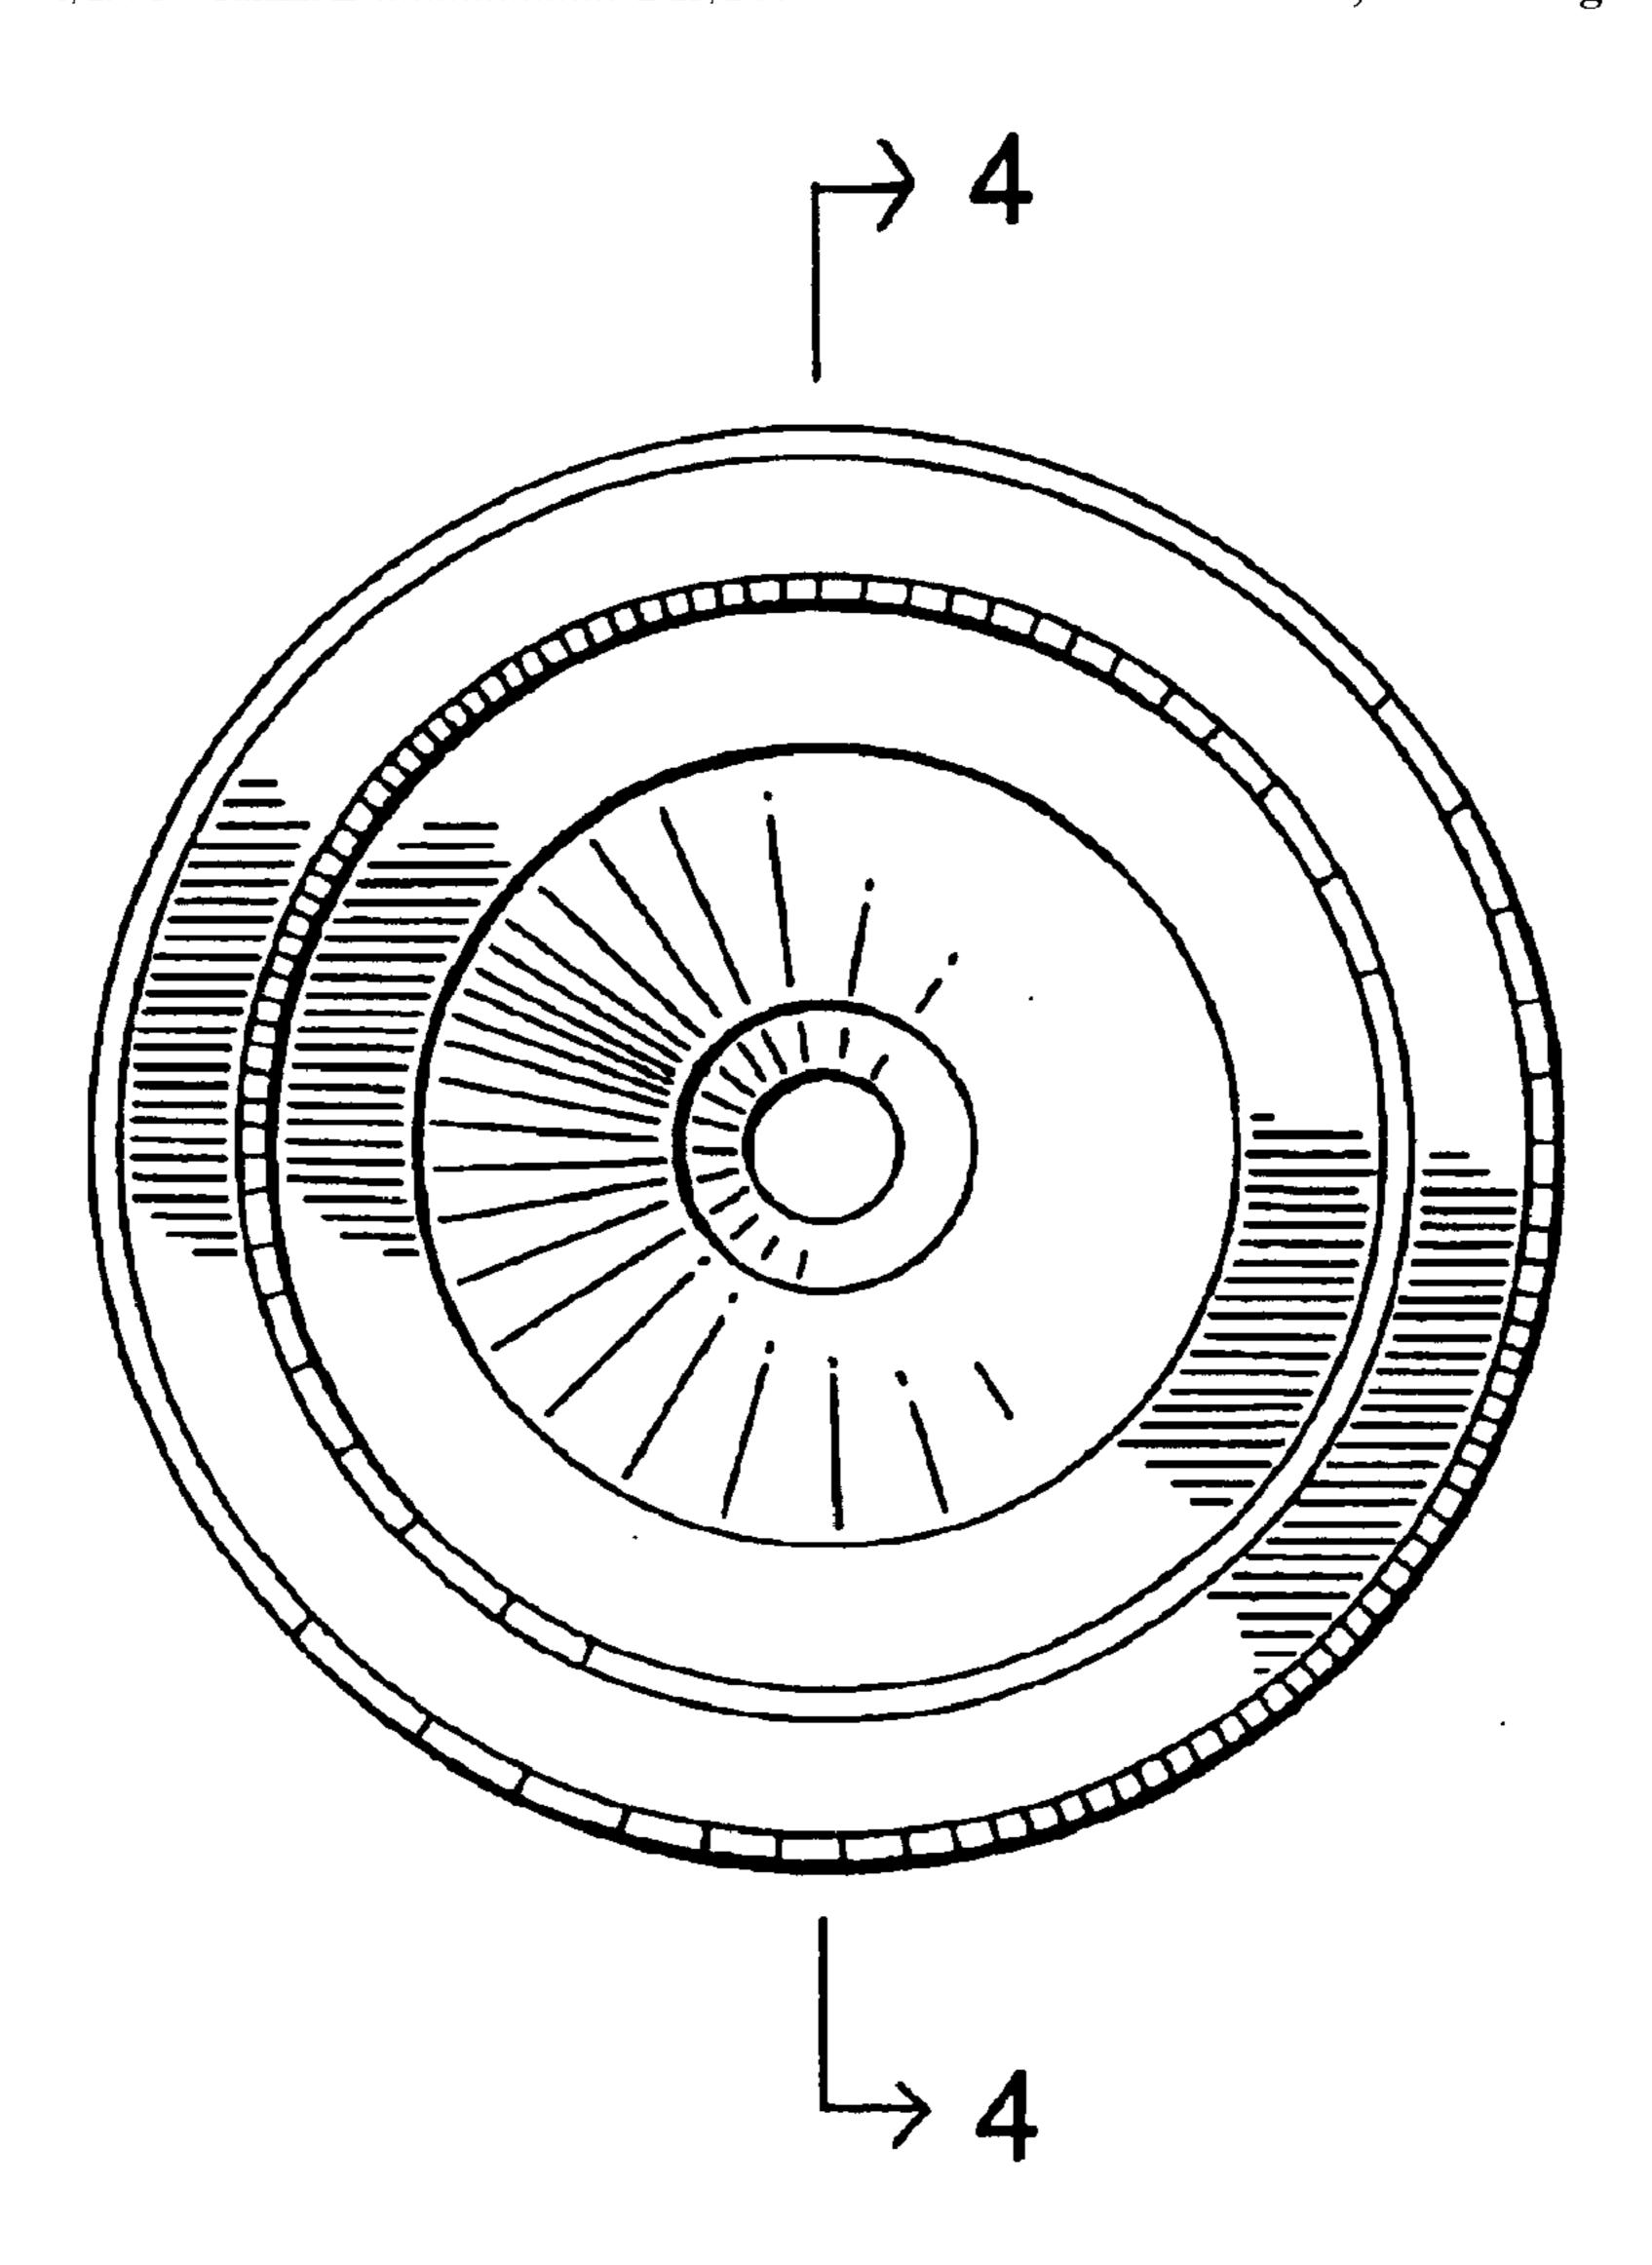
is a right side view of a nozzle for a plasma arc torch showing our new design;
